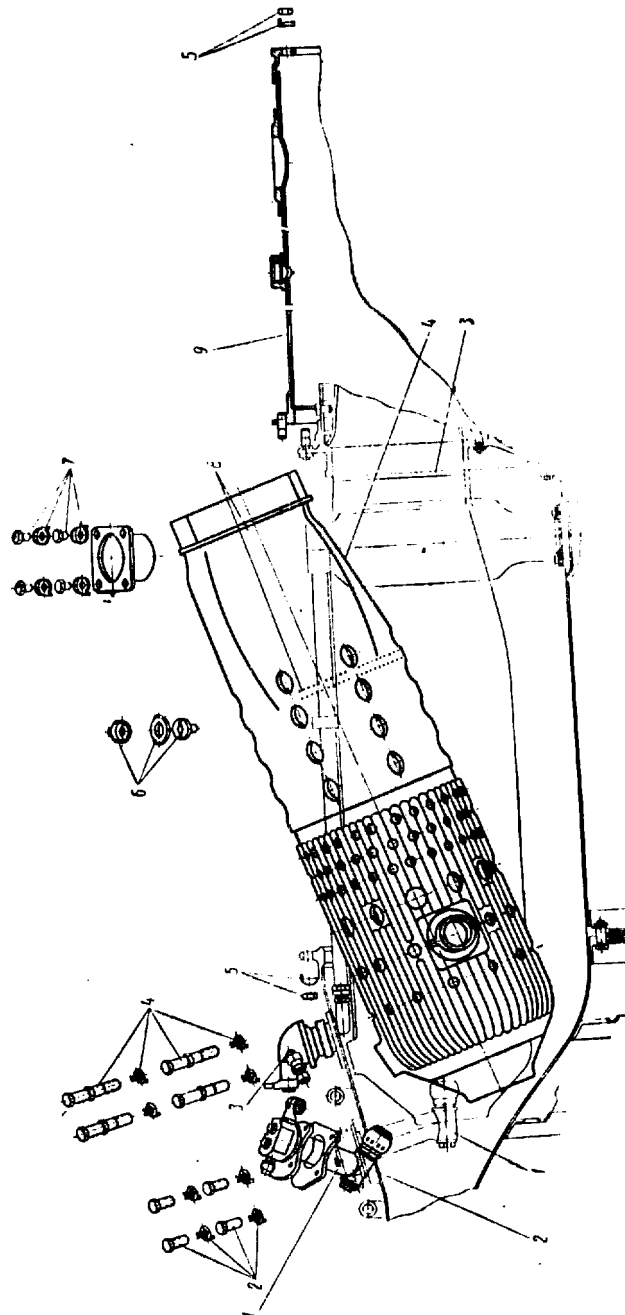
Replacement Diagram of Igniters, Burners and Combustion Chamber Flame Tubes:
